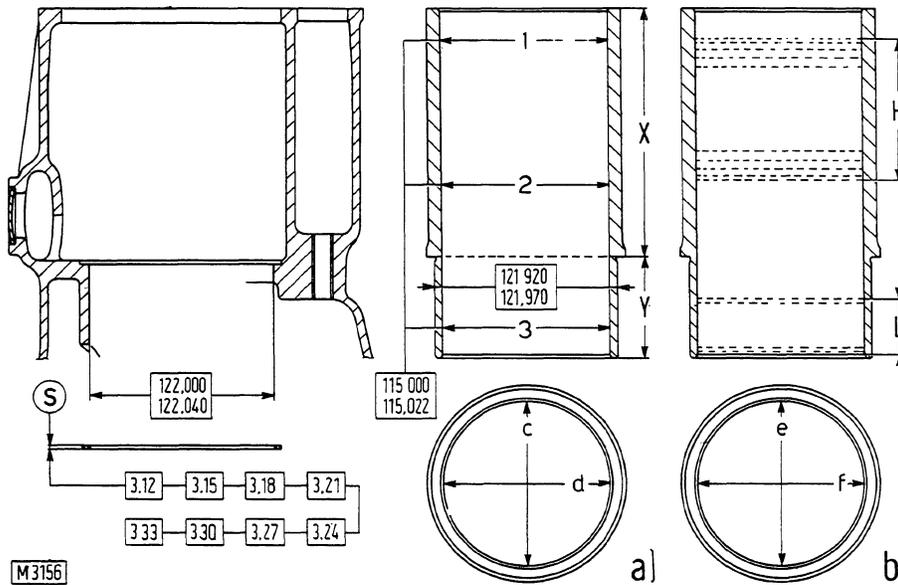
Standard dimensions of new cylinder sleeves and relevant bores in the block (a) and checking wear (b). H. Worn sleeve I.D. measuring area to check wear along axes (e-f) - L. Sleeve I.D. measuring area to determine sleeve-to-piston clearance along axis (f) - S. Shims to raise the sleeve - X = 167 mm (6.57 in), Y=68 mm(2.67in) Areas for check of out-of-roundness of new or refaced sleeves - 1,2 and 3. Measuring levels of new or refaced sleeve inner diameters along axes (c-d).
